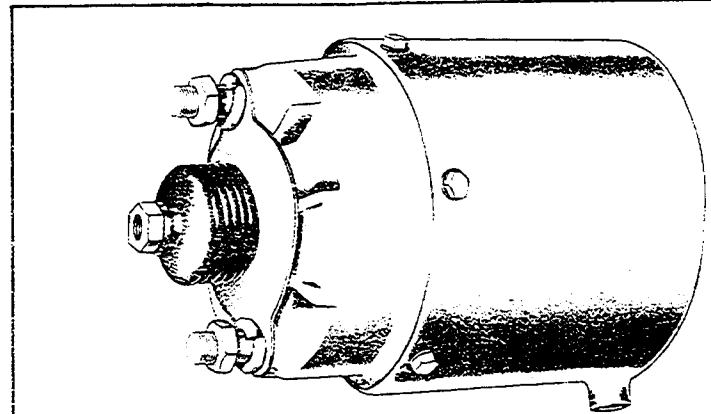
EXTERIOR VIEW SPRING BRAKE ACTUATOR
